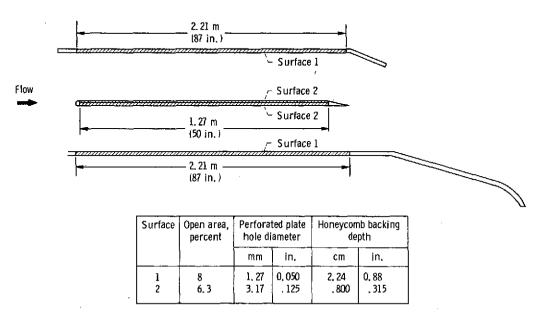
Exhaust suppressor. Perforated plate sheet: thickness, 0.51 millimeter (0.02 in.); material, aluminum. Honeycomb cell size, 0.95-centimeter (3/8-in.) hexagons.
